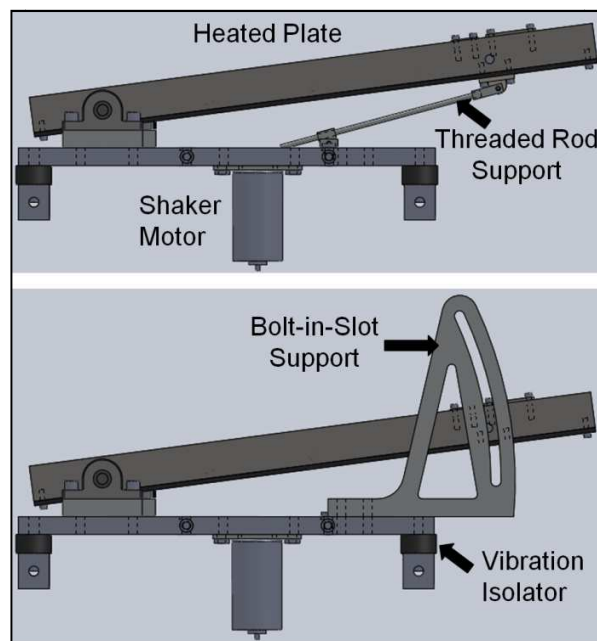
Detail of Plate Support System Showing Threaded Rod Arrangement (top) and Fixed Support Arrangement (bottom)
